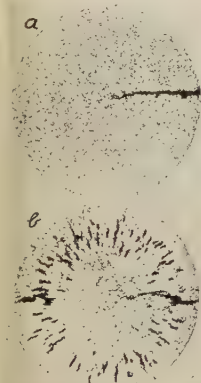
Specimen F1B, sectioned (a) 4 hr., (b) 7 hr., after quenching.
